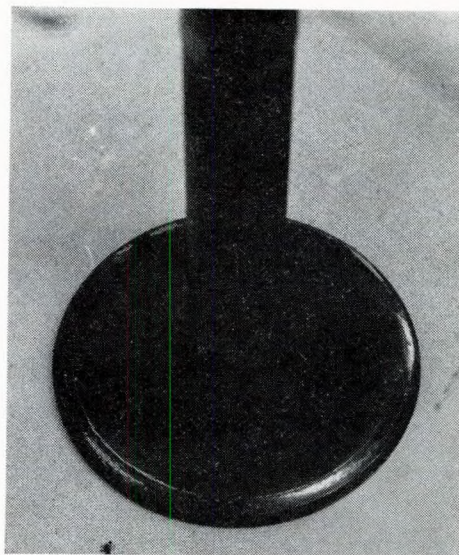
TM 410 exhaust valve after 500 hours operation with the seat ± 1.5 mm out of true
